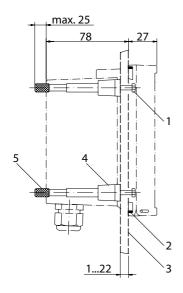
protective hood for wall and pipe mounting (All dimensions in mm!)
